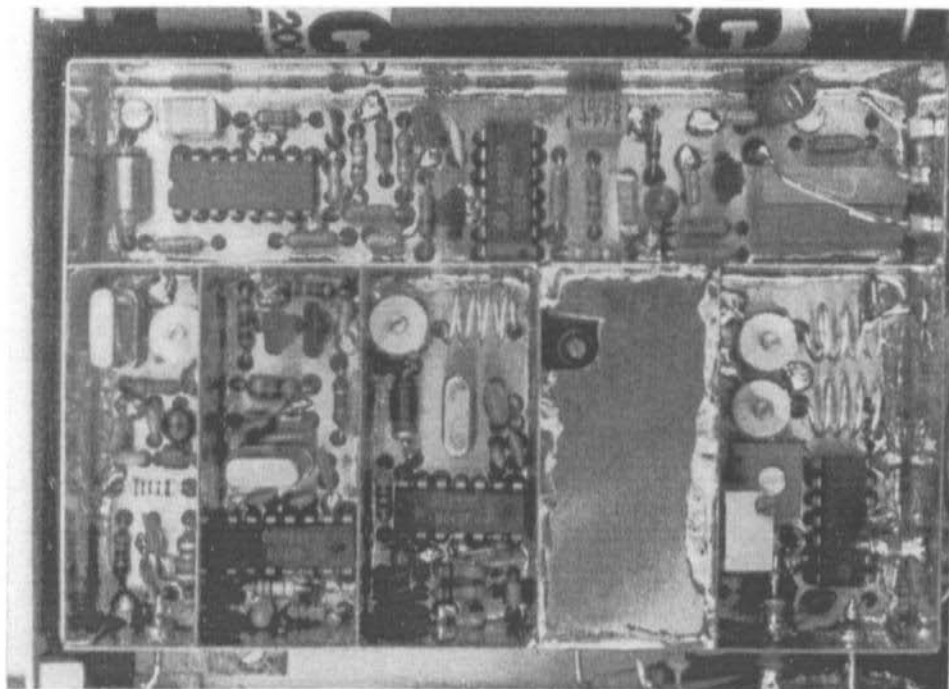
Prototype of the fully equipped PCB DB 2 NP 002. The oscillator stage is largely hidden away under the soldered-on compartment cover. The trimmer C3 must be accessible. This is achieved by providing a 5 mm hole in the PCB and reversing the trimmer so that its slotted spindle protrudes through the ground-plane. It is then soldered to the track-side.
